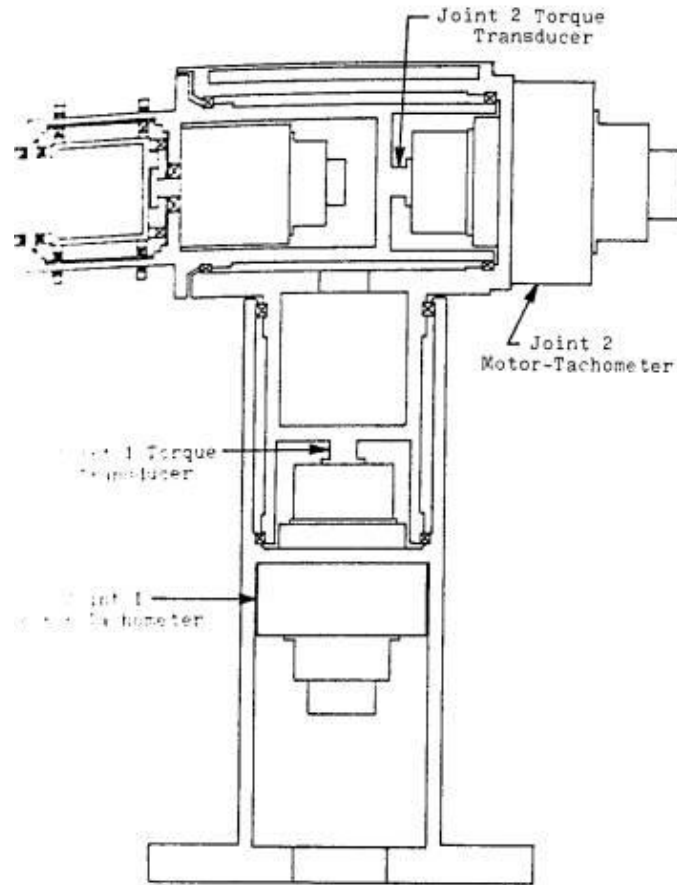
Joints 1 and 2 assembly of Stanford Arm.
